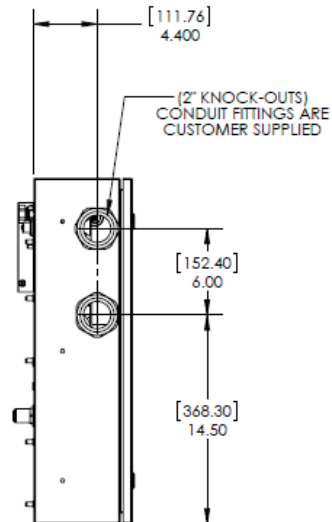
CUSTOMER SHOULD SUPPLY WATERTIGHT CONDUIT IN THE PROVIDED 2 INCH KNOCKOUTS
